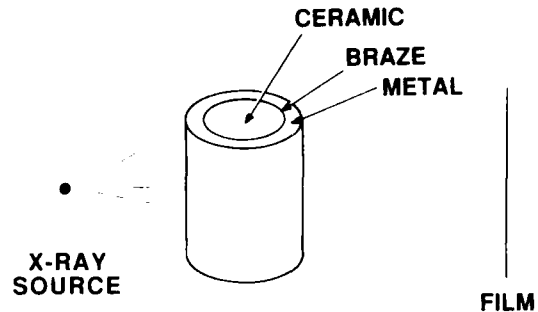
Prototype Ceramic-Metal Joint. The simplified illustration of a prototype ceramic-metal joint can be viewed as a ring of metal brazed to a cylindrical ceramic rod.
